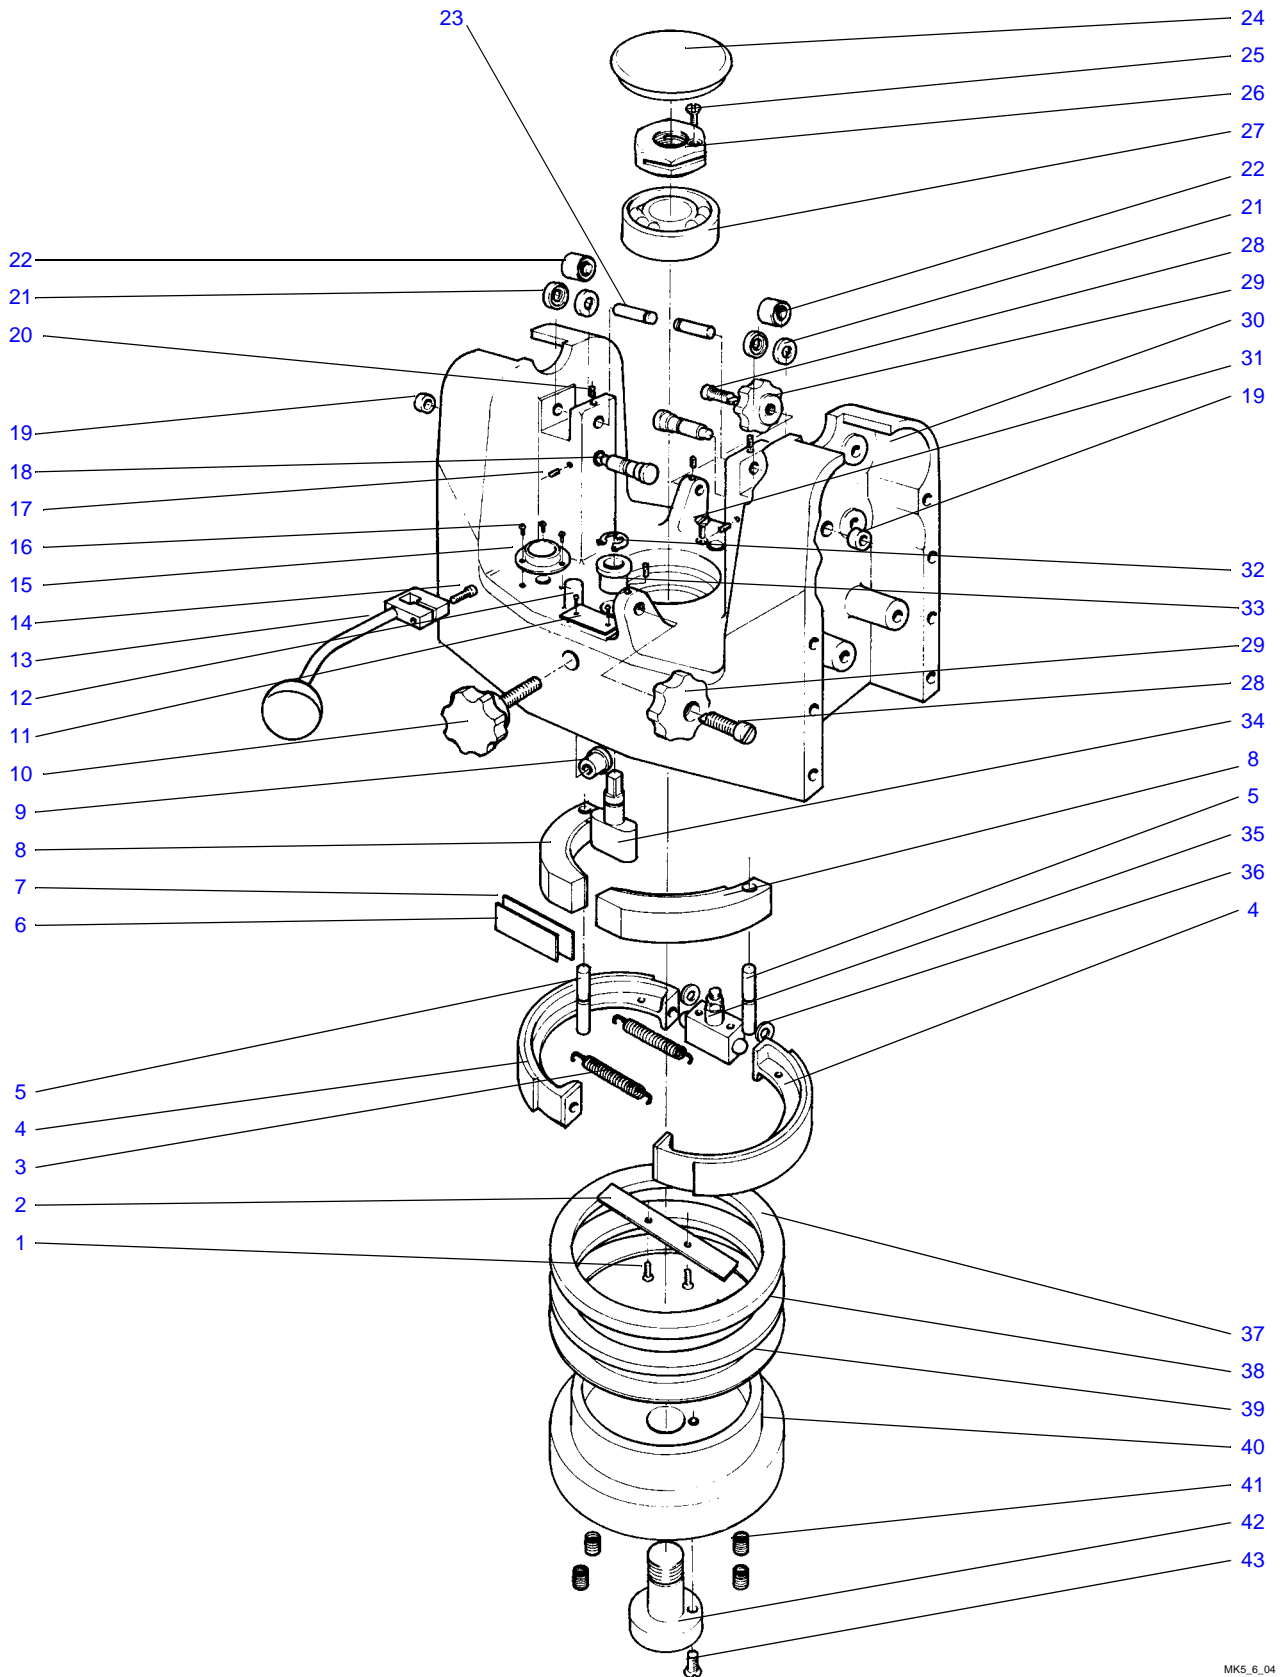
Mk 5 Pan and Tilt Head - Body Assembly (3716-11)
